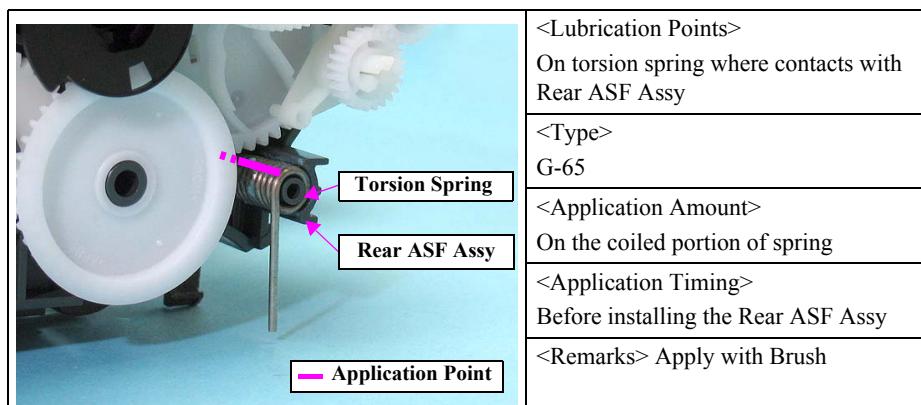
Lubrication of the Rear Paper Guide (7)
